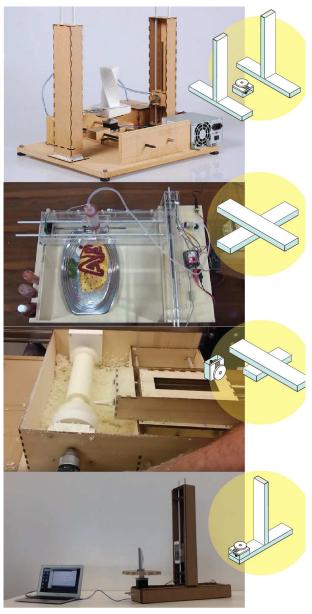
Machines built in the wild using the Cardboard Machine Kit: A 4-axis hot wire cutter by Fablab Monterey, an omelette ketchupping machine by Fablab Kitakagaya, a lathe by OpenDot, and a 3D scanner by Fablab Pueblo. Schematics of motion modules shown on the right.
